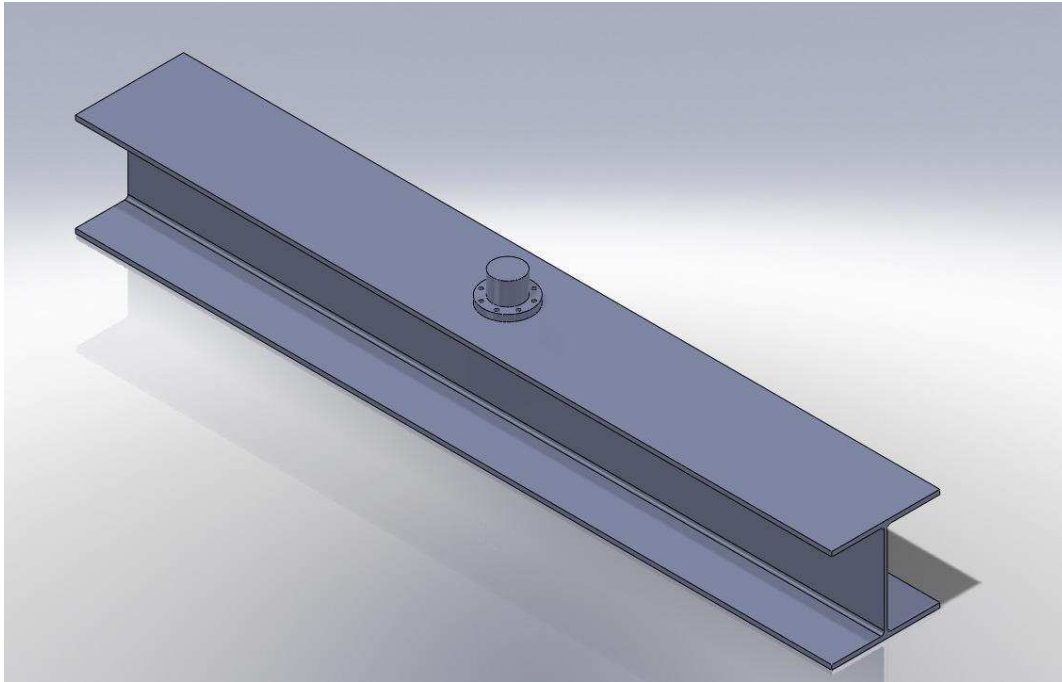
Bottom wide-flange with a test model of cylinder mounting
